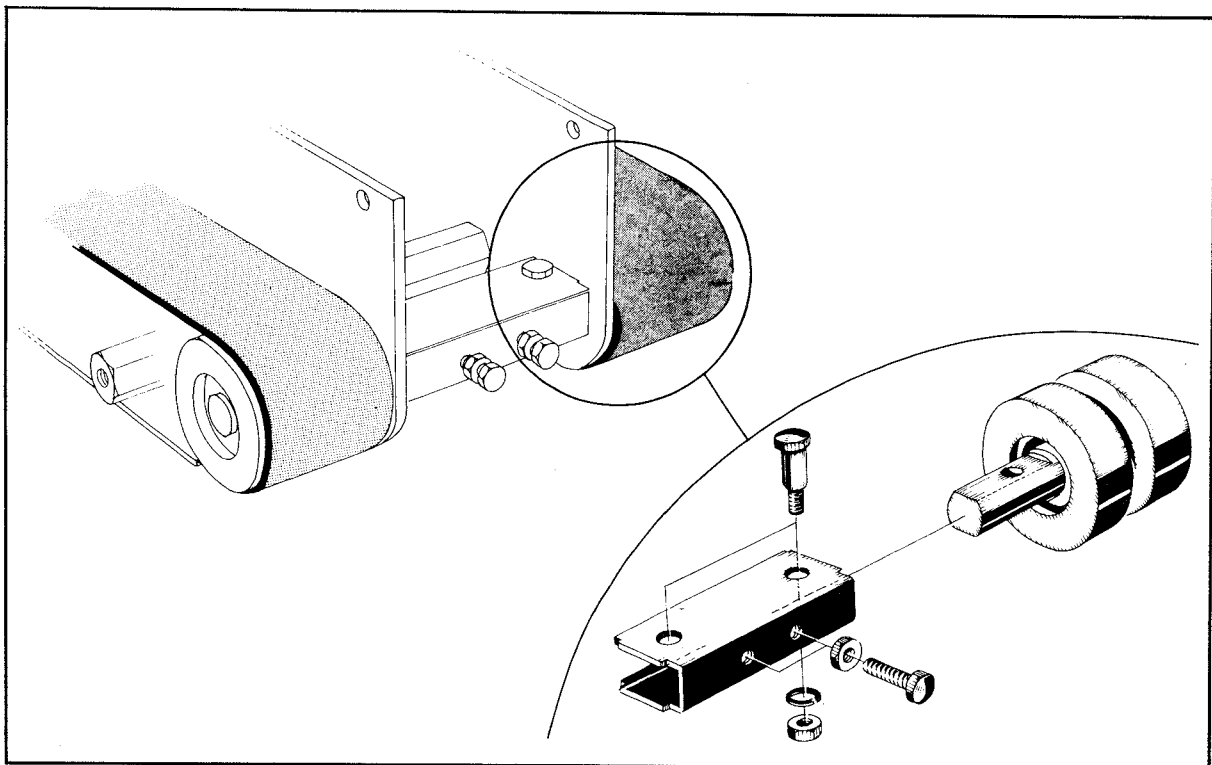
BOX DRIVE BELTS - TAPING HEADS
